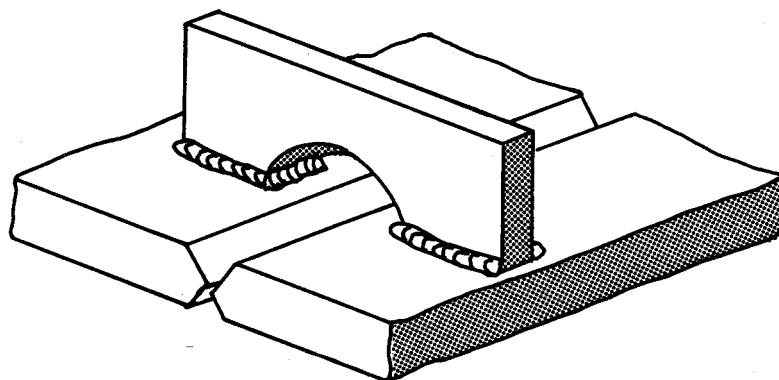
SCALLOP CROSSING BUTT WELD
